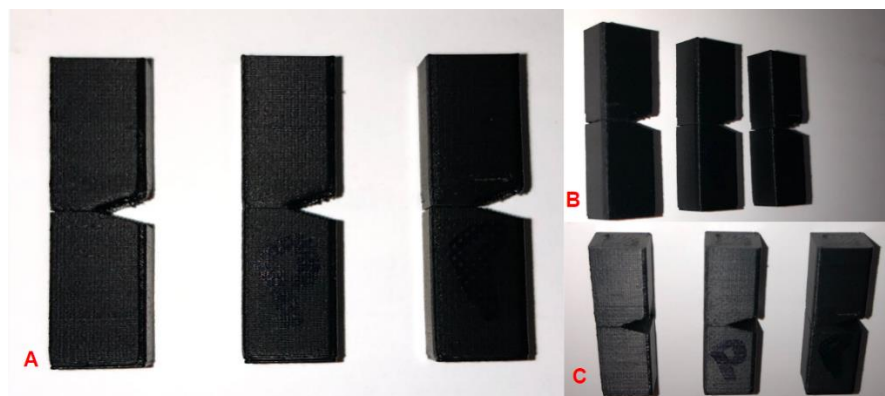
P_pp samples: A - front view; B – front and top view; C – Front and side view.
